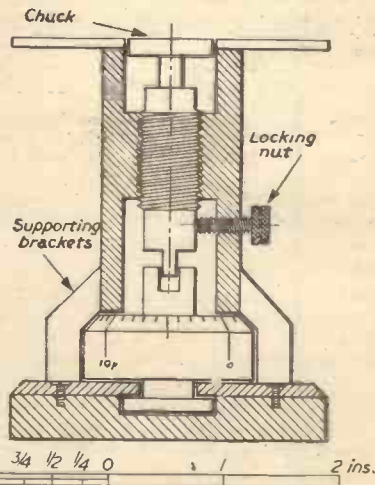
The hand microtome. This is easily constructed from brass or similar metal. The instrument can also be purchased for about £2. The finer the screw thread the thinner the sections will be. The top platform must be perfectly plane or the sections will not be of uniform thickness. Note.—The microtome may be calibrated at the rotating base using a micrometer.
